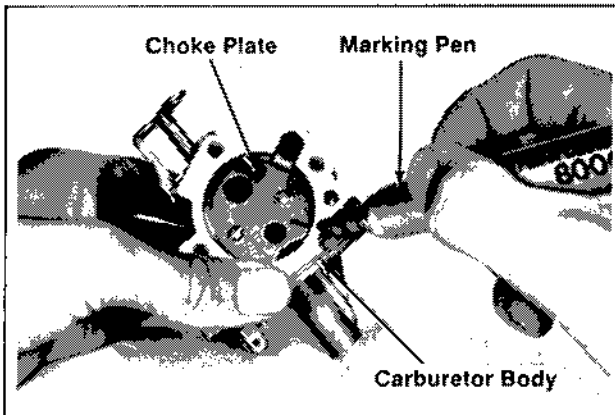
B-8. Marking Choke Plate and Carburetor Body.
